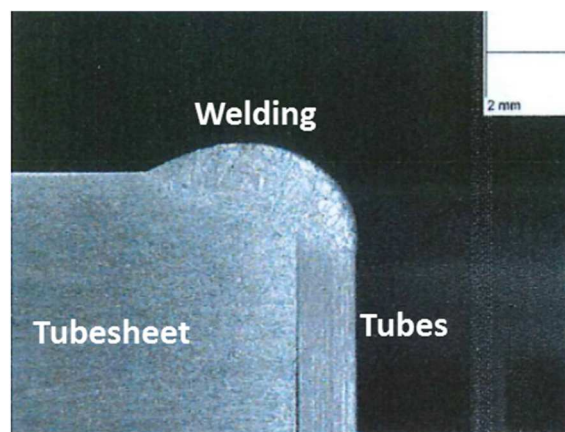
Macrographic examination of the tubes welding on tubesheet performed for the PQR
